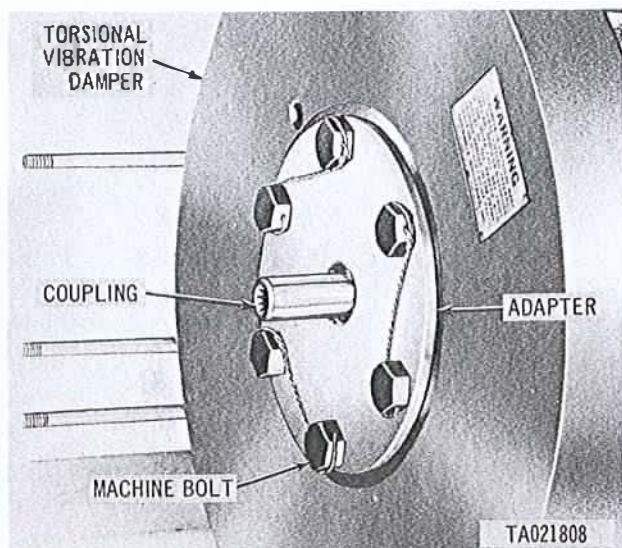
Removing or installing fuel pump drive coupling adapter and coupling, model AVDS-1790-2C and AVDS-1790-2D engines.
